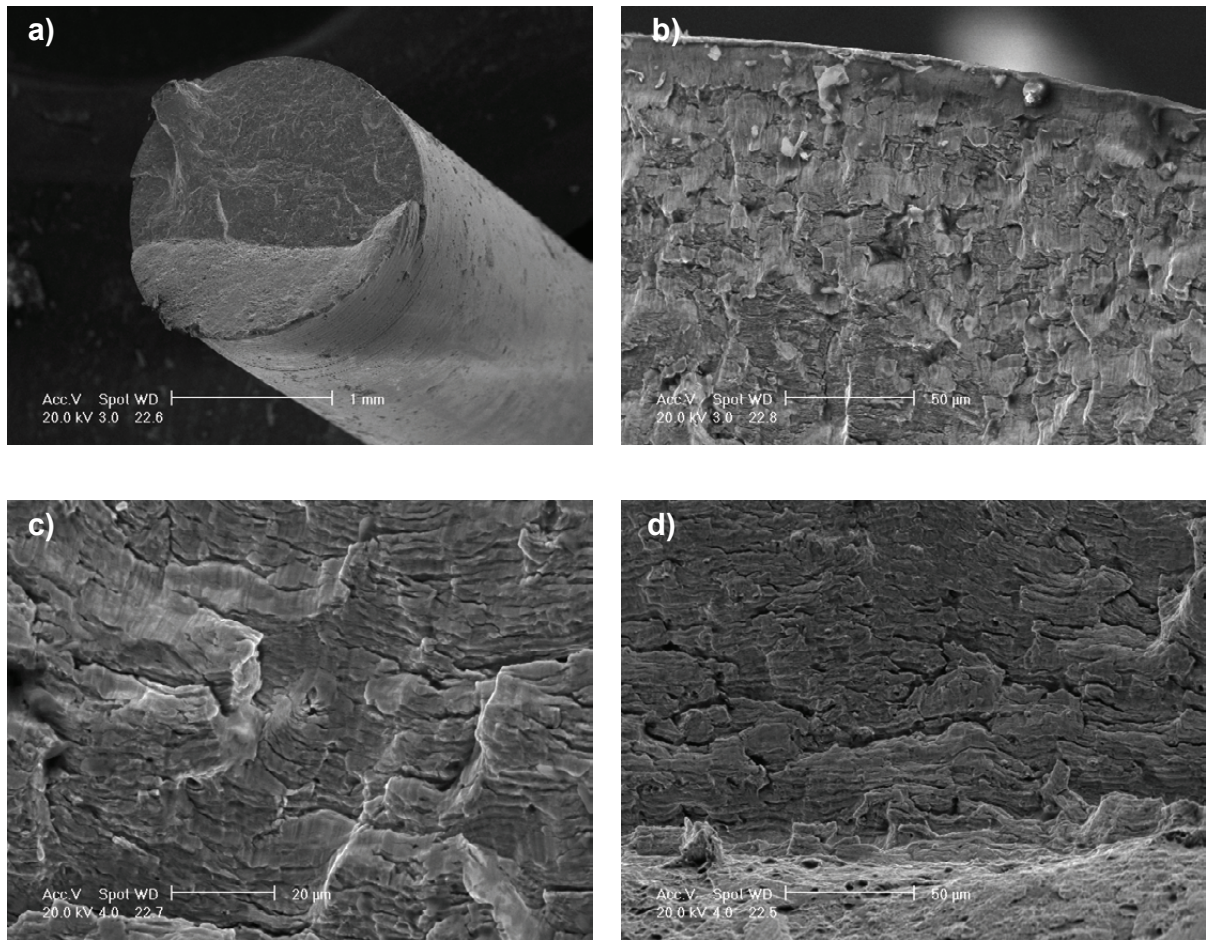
SEM micrographs of E1 10 (71 dpa/334 °C) after LCF test at $\Delta\epsilon_{\text{tot}}=1.0\%$ at 330 °C: a) an overall view; b) fracture appearances close to the specimen surface; c) fracture appearances in the middle area of the fatigue crack propagation; d) fracture appearances close to the end the fatigue crack propagation.
